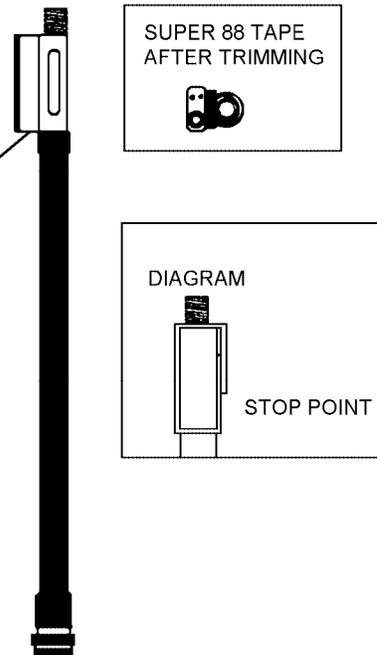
Unmodified Regulator to Seat Kit Hose Assembly Taping
